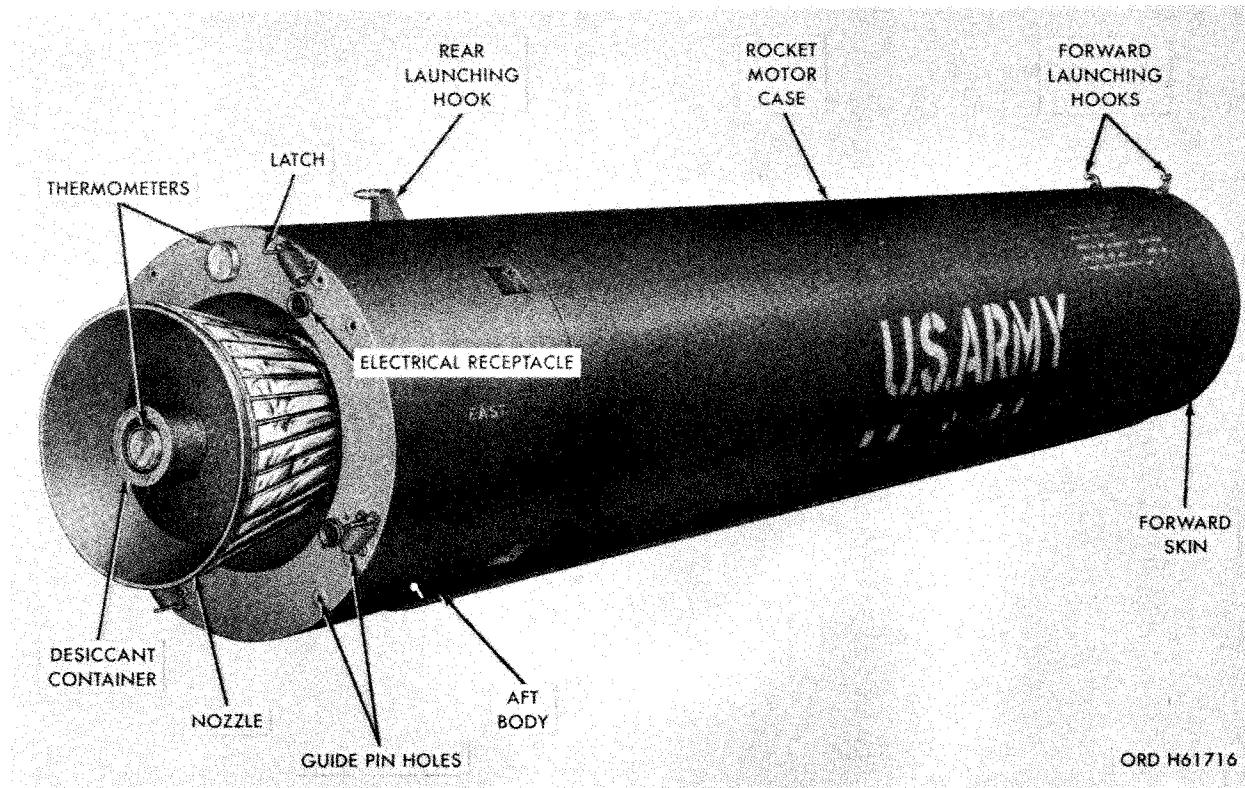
ROCKET MOTOR XM100 - REAR VIEW.
